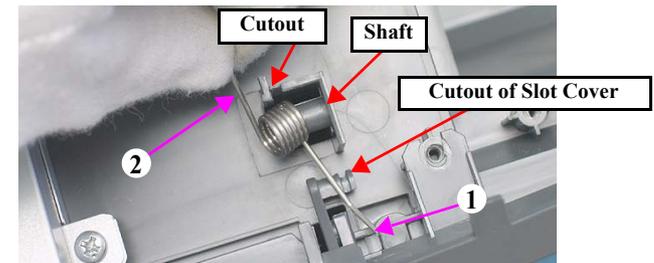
Reinstalling the Torsion Spring (R360/R380/R390 only)
